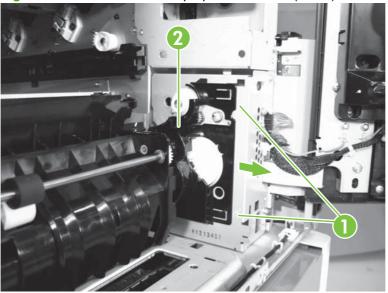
Remove the multipurpose drive unit (5 of 7)
